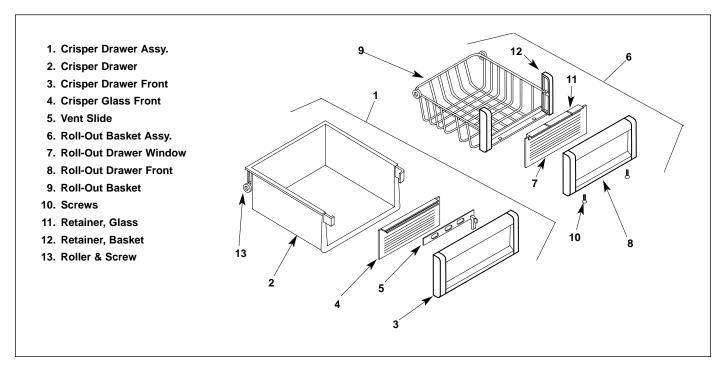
Crisper and Roll-Out Basket Assemblies
